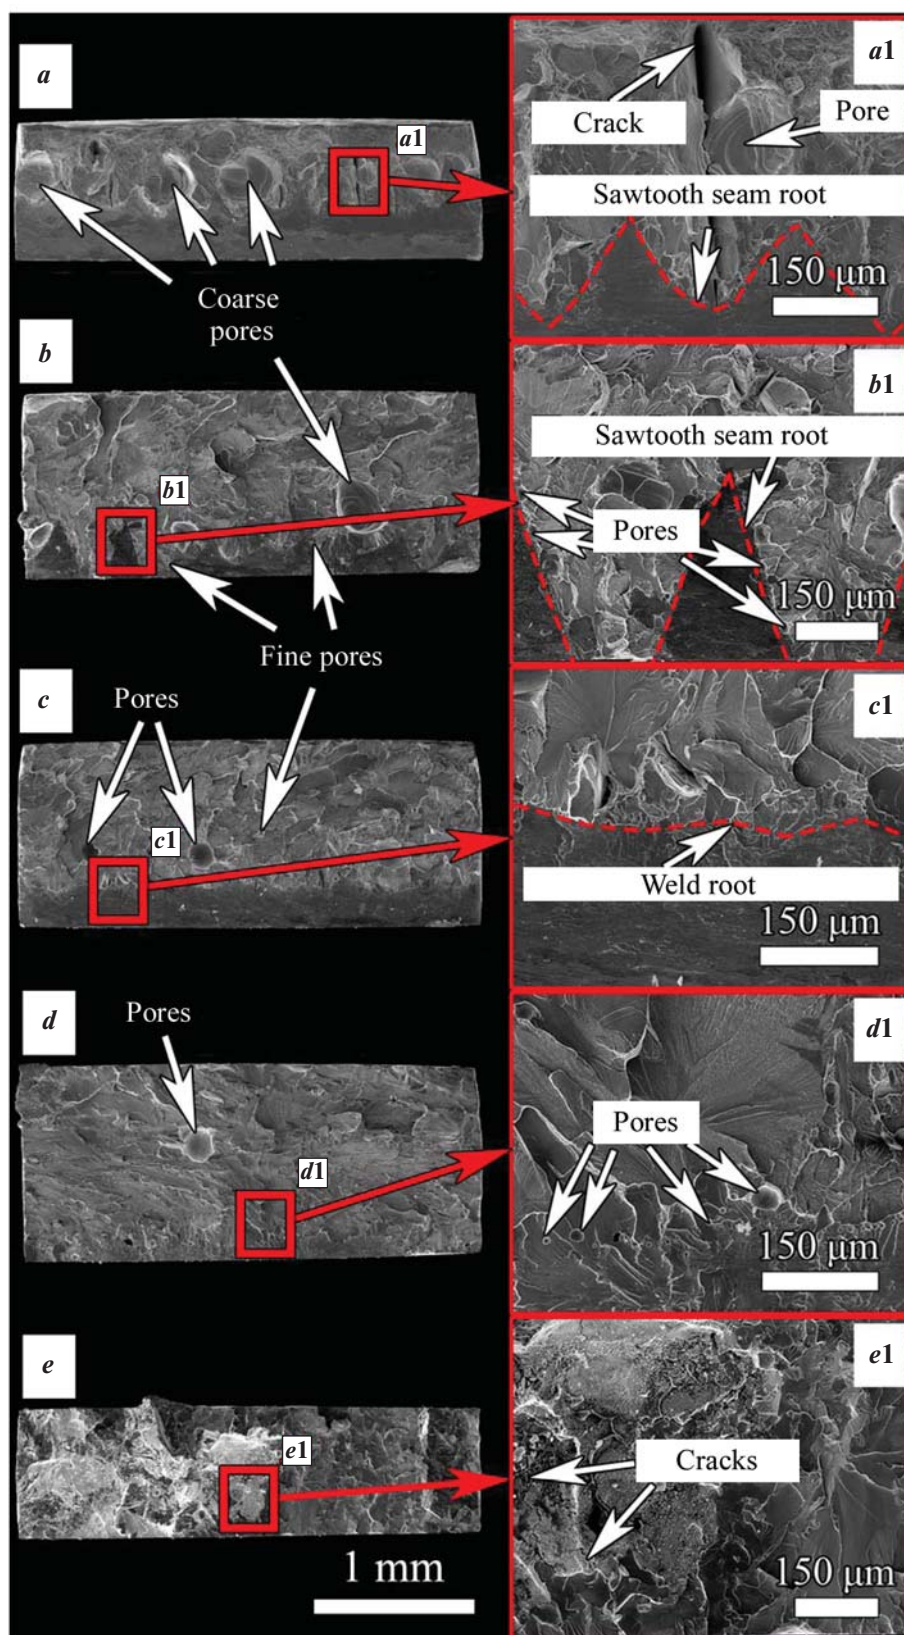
Morphology of fracture surface of tensile specimens depending on PLW modes
